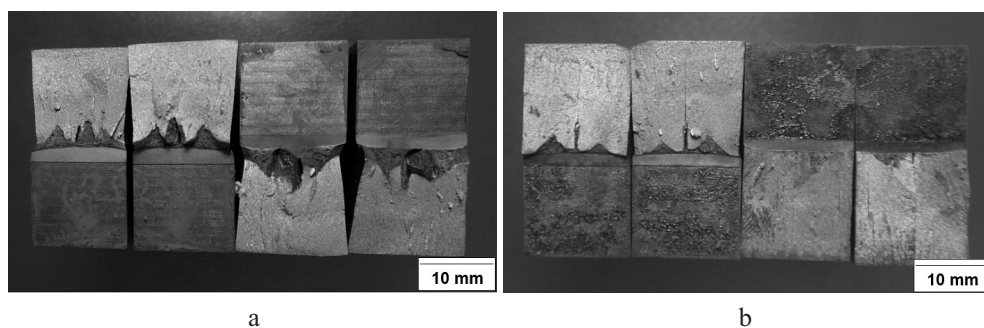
Fracture surfaces of original specimens (a) and saturated H₂S pre-corroded specimens (b).
